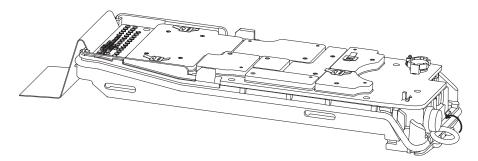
Assemble the Main O-Ring at Antenna Holder
